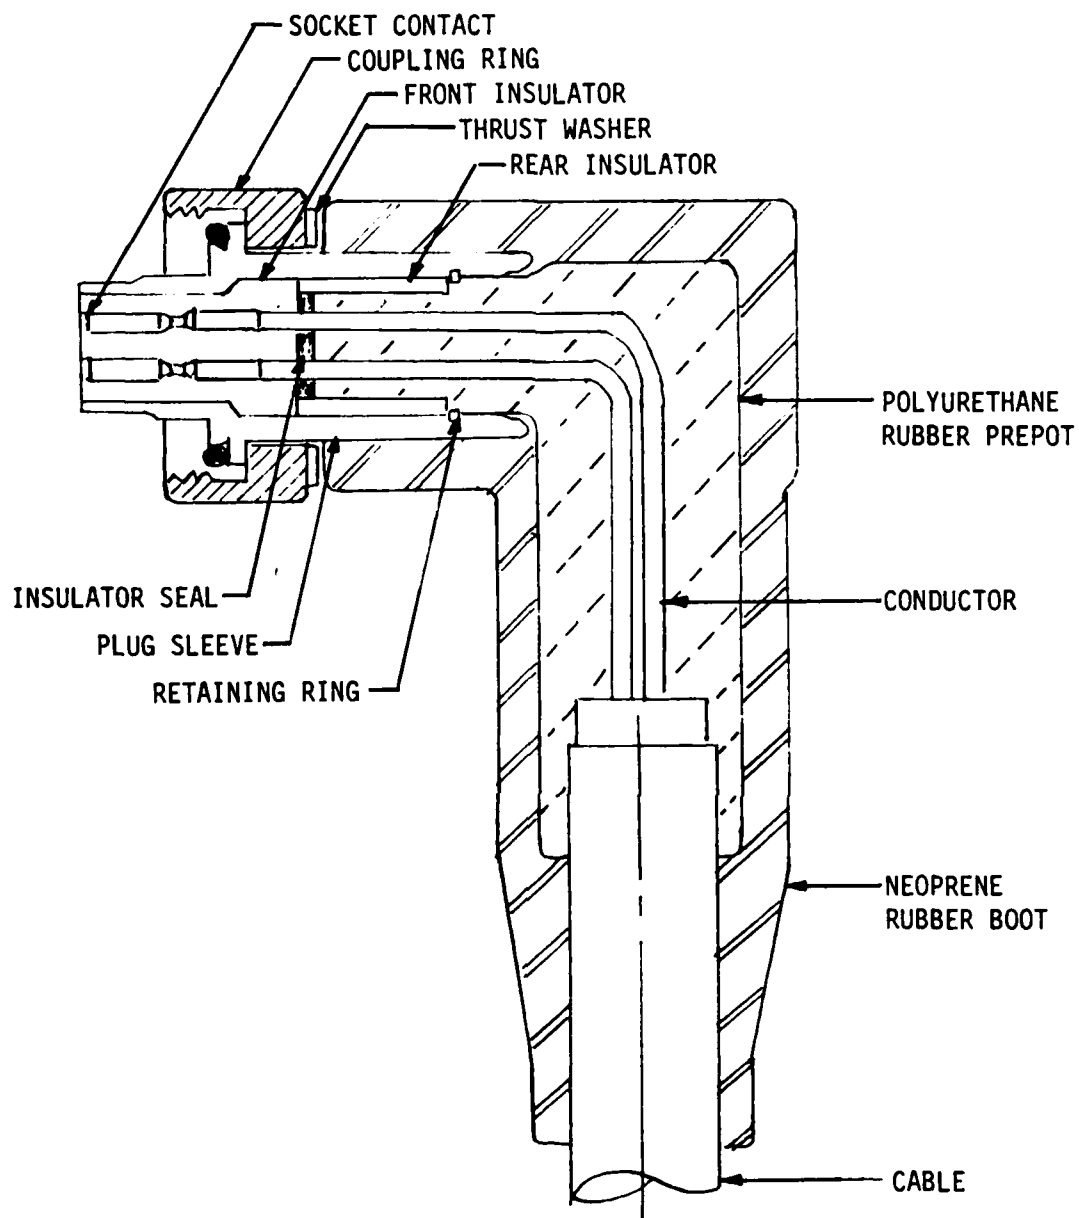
NR-1 MIL-C-24217 PLUG ASSEMBLY
